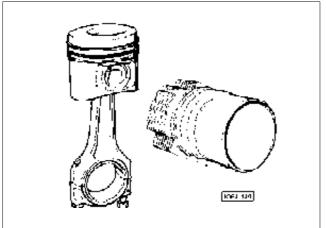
Install the piston rings on piston and then connect piston to connecting rod;
